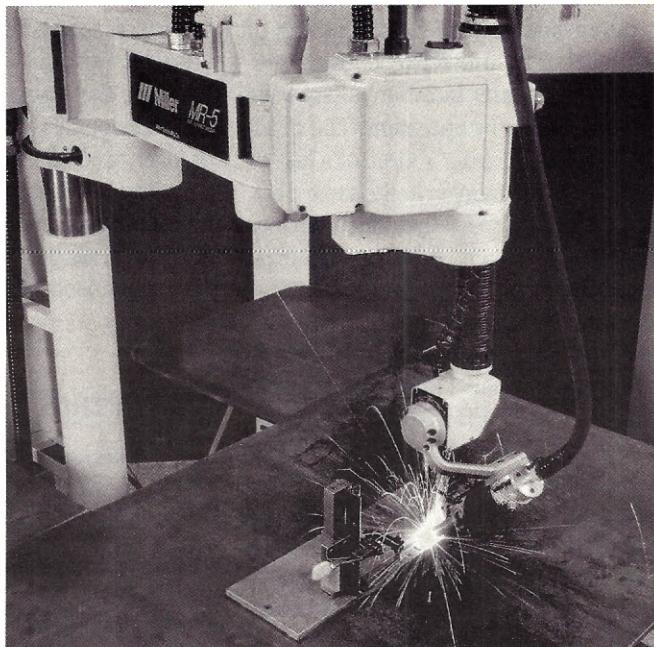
The robot is shown welding a rectifier mounting bracket that will be used with its welding power source.
